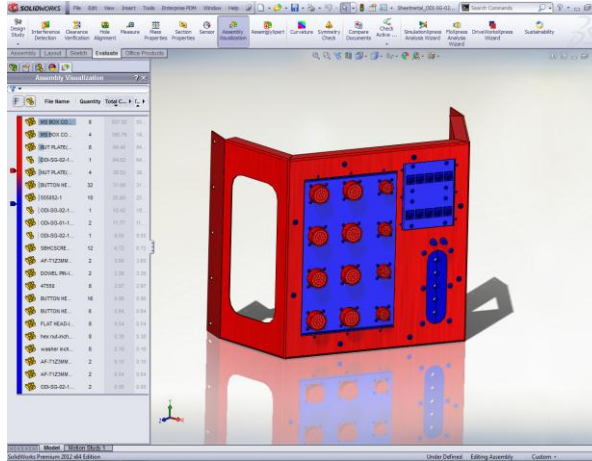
Showing the cost of each part in the assembly, where red parts are more costly than the blue parts
